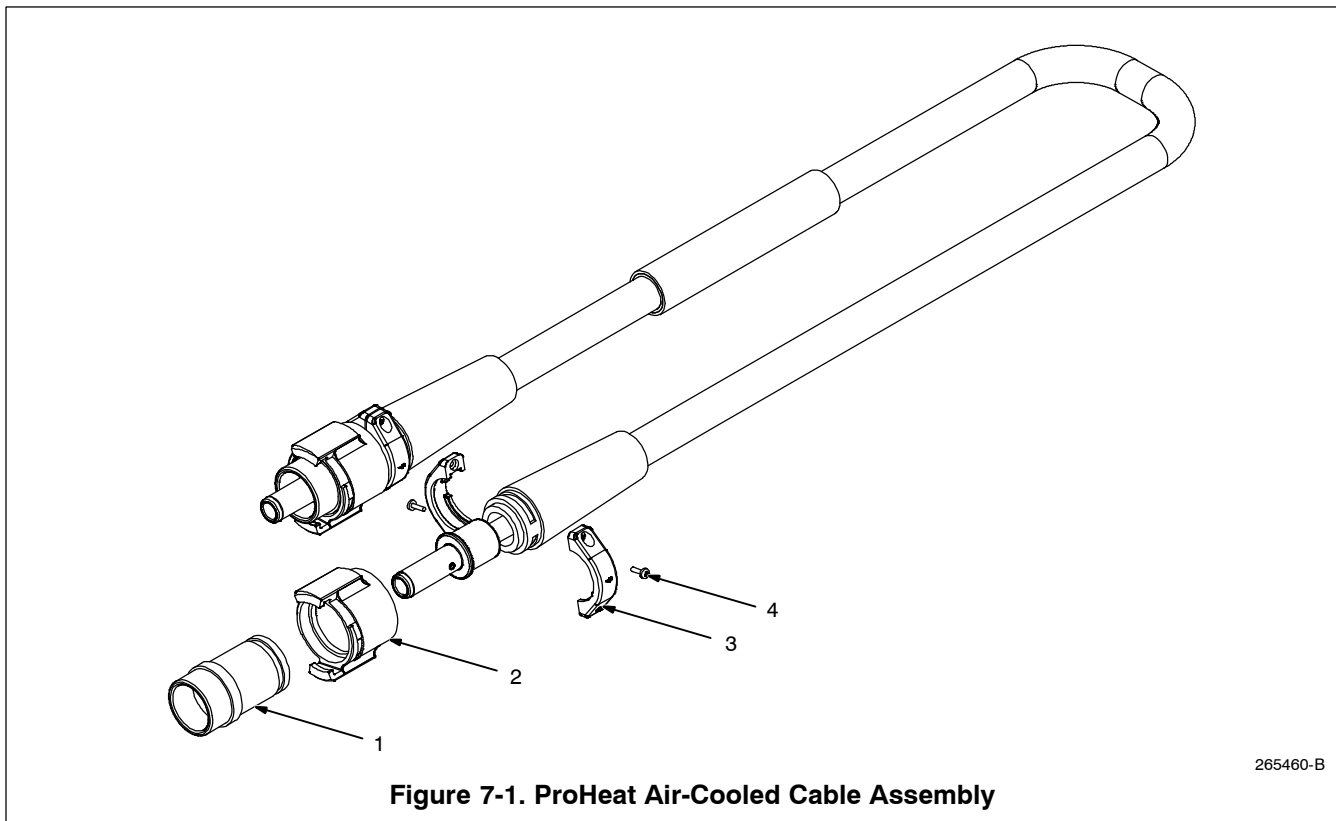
ProHeat Air-Cooled Cable Assembly
